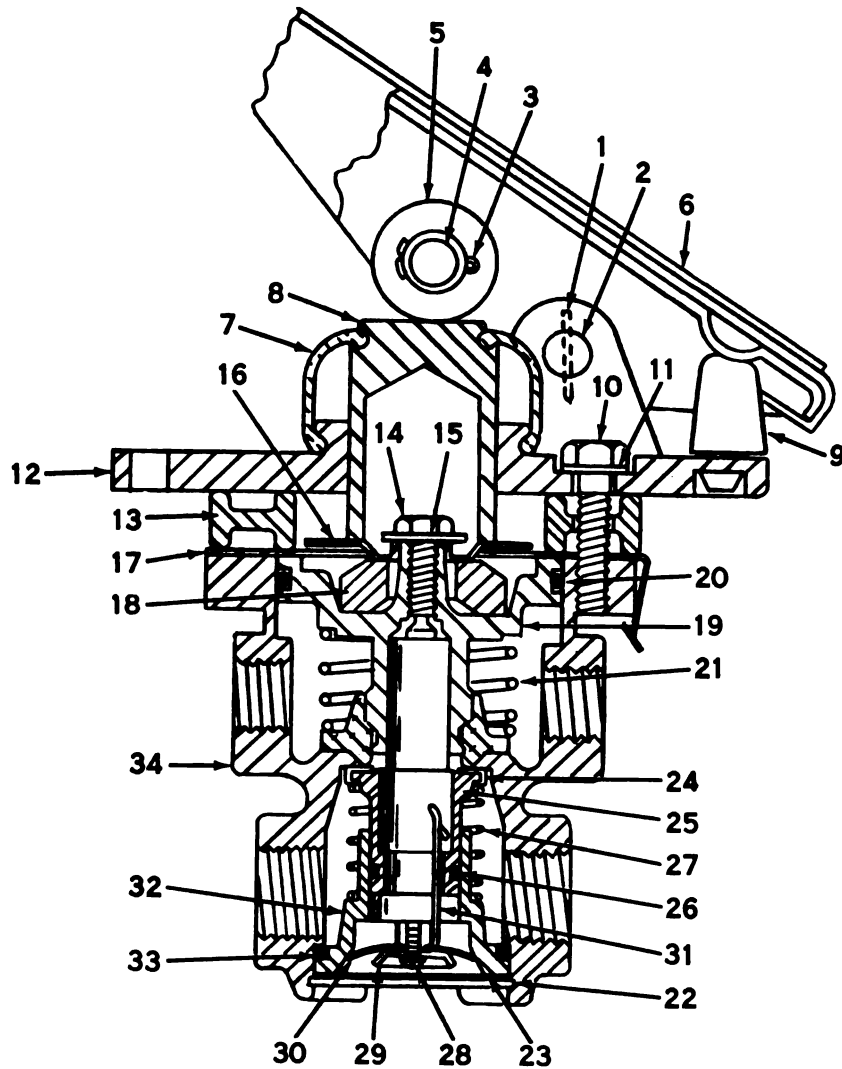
Tractor protection valve, disassembly and reassembly.
